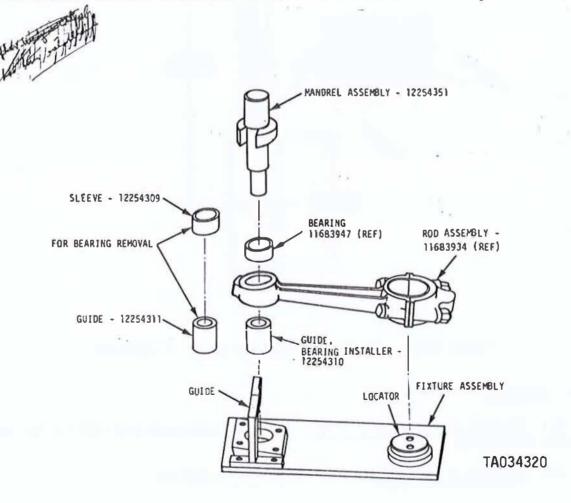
Fixture assembly - installing and removing connecting rod bushing.
